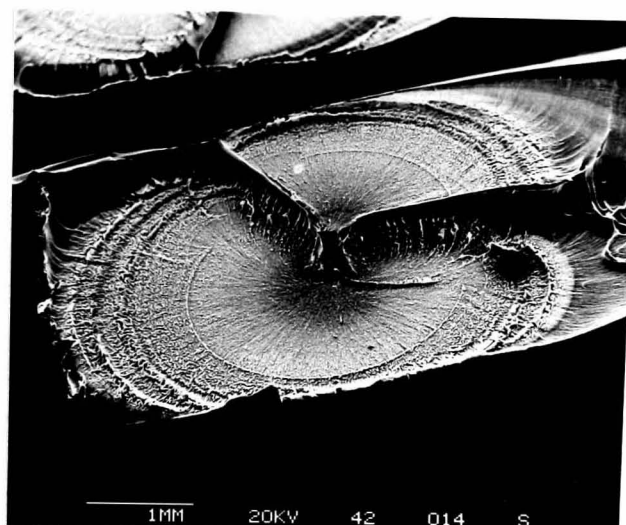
a) Fracture surface of 32mm CHDPE-F/2 pipe.
